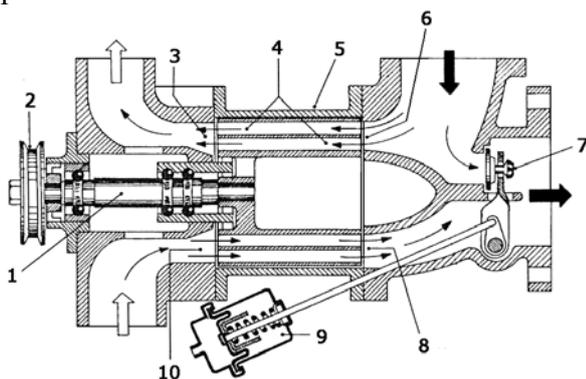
The components of the PWC [1, 4]: 1-drive shaft; 2-drive pulley; 3-compressed air exit port; 4-rotor channels; 5-rotor case; 6-exhaust gas intake port; 7-wastegate valve; 8-exhaust gas exit port; 9-wastegate valve actuator; 10-air intake port.
